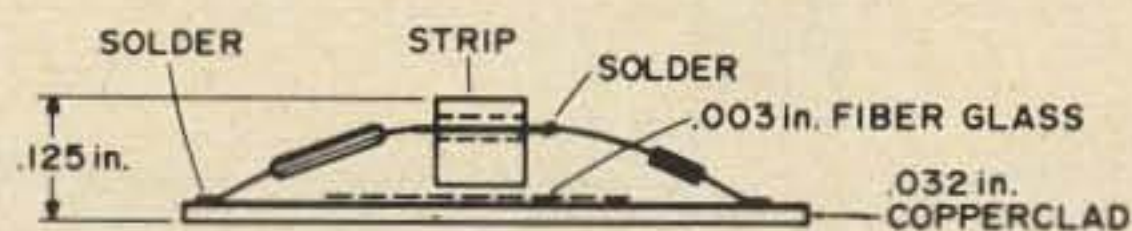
Side view shows terminal strip utilization and mounting technique.
